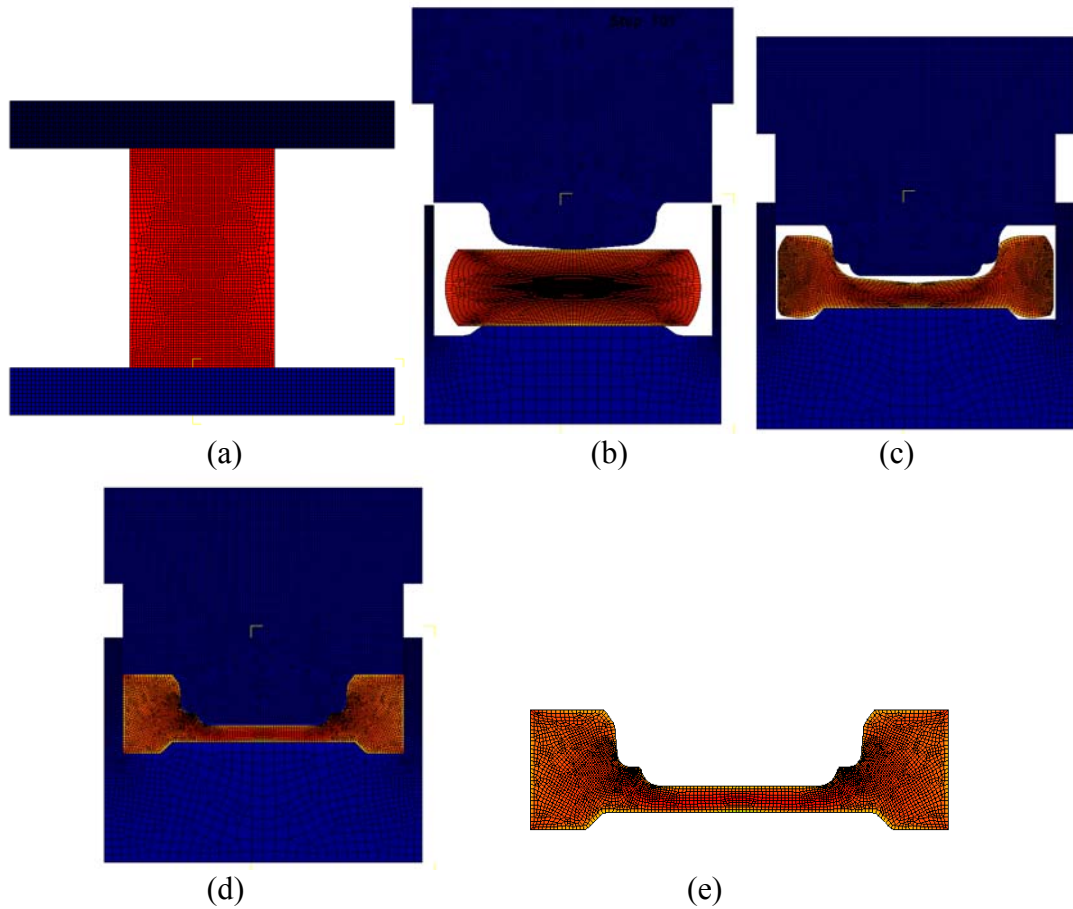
Schematics of a) buster, b) blocker c) finisher d) end of stroke and e) gear blank forging (courtesy: Eaton Corp., South bend, Indiana)
